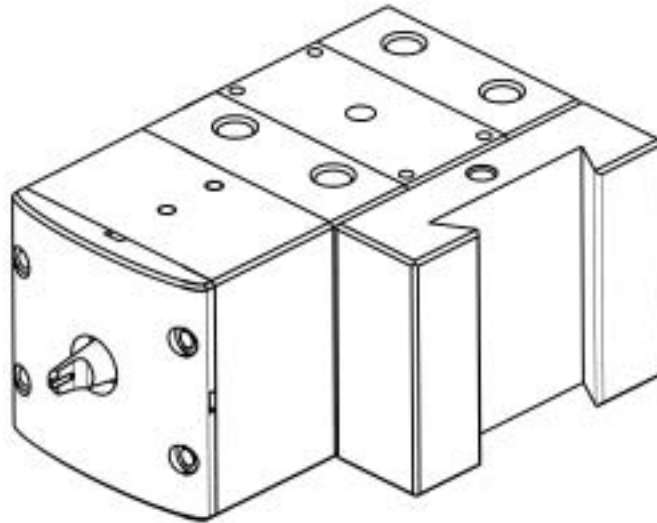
Assembly Drawing of UMHS with Aluris Attachment
